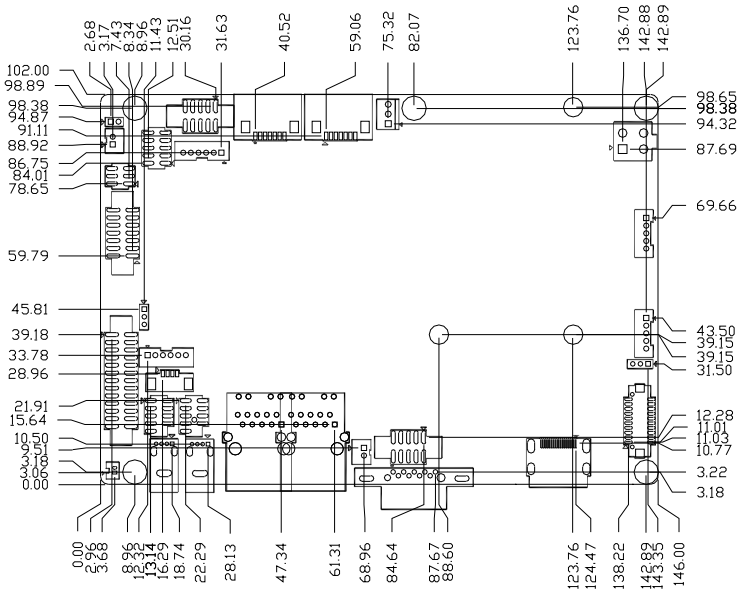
PCM-9363 HDMI Mechanical Drawing (Top View)
